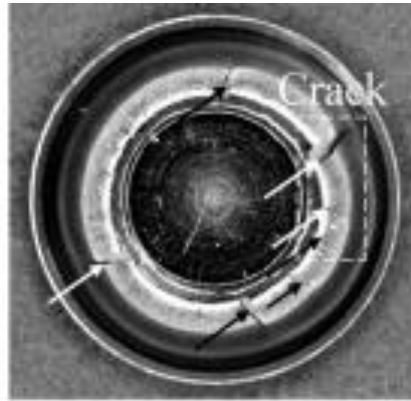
Metal fracture on lower sheet (Mori and Abe, 2018)
